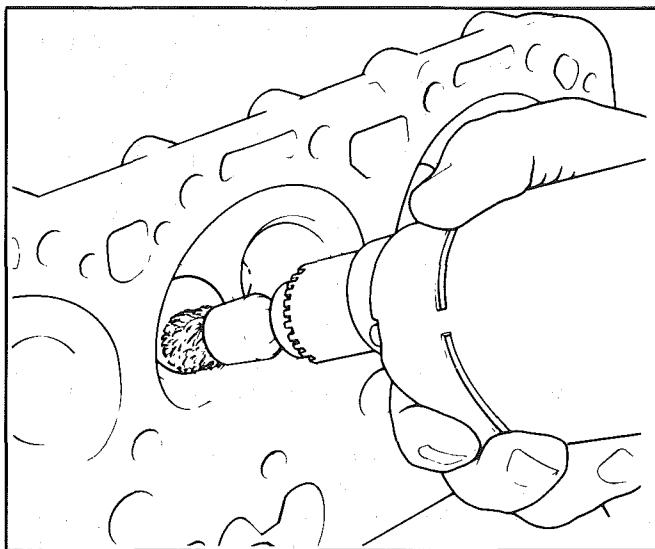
A3-17 Cleaning Combustion Chambers-Typical
